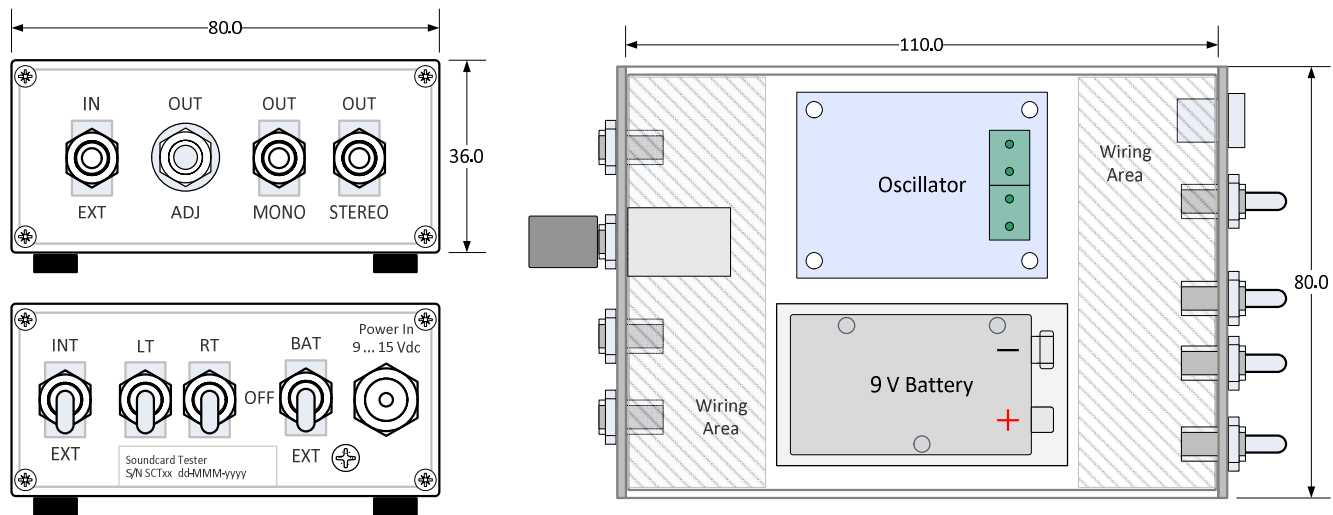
~ Soundcard Setup Tester layout drawings showing front and rear panels and plan view of interior. These drawings form the basis for full-size drilling templates briefly described in section 5, Construction.
